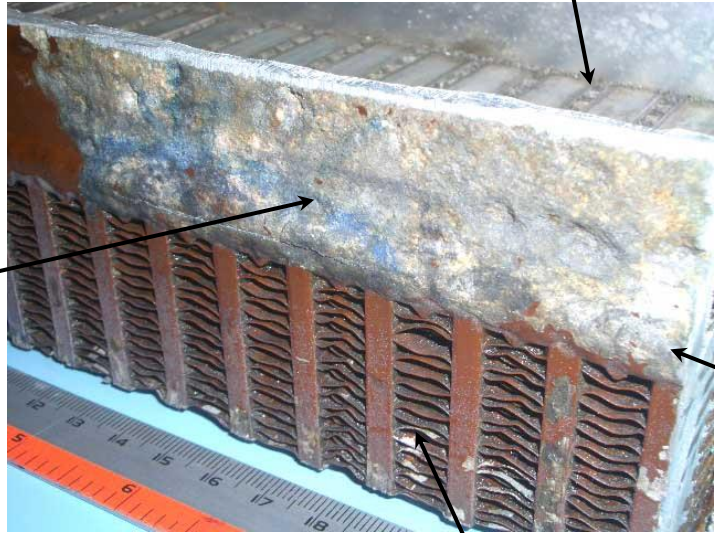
Close up view of the inside header port, showing a number of oil passages containing distributor fins and parting line of the weld joint between header and side bars/parting sheets.
